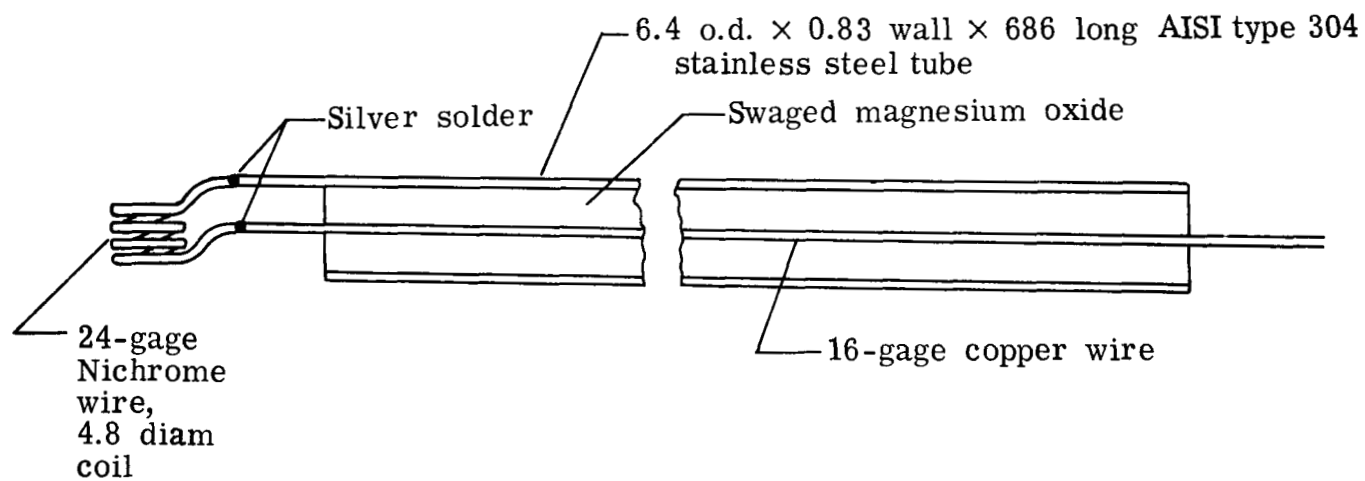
Hot-wire igniter probe. Dimensions are in millimeters.
